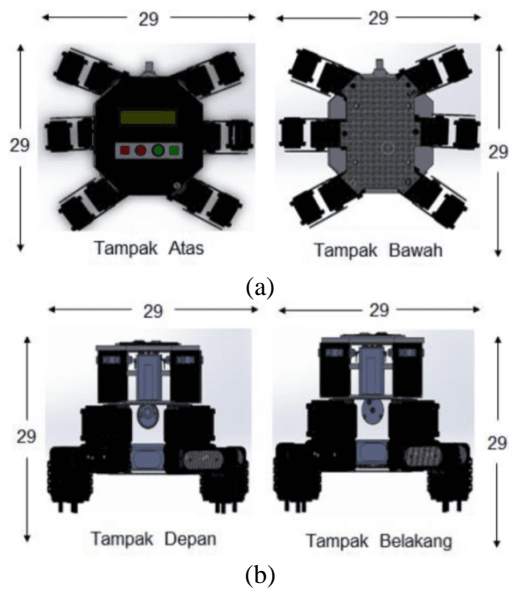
Robot design, Tampak Atas (Top View), Tampak Bawah (Bottom View), Tampak Depan (Front View), Tampak Belakang (Rear View)
